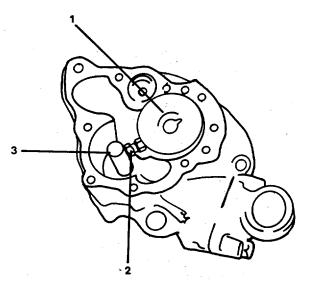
Install the Guide Bushing into the Gear Pocket.
